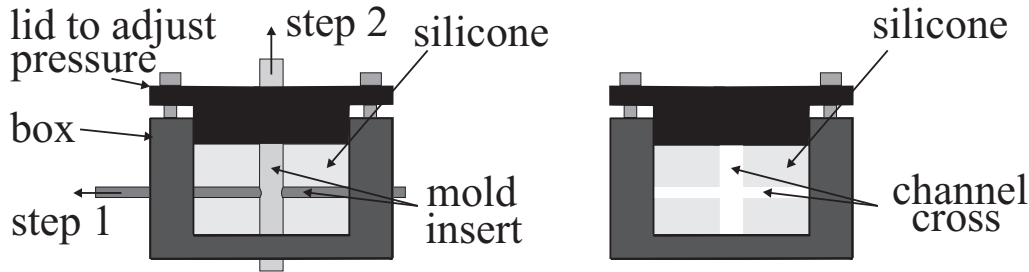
Sketch of the molding process for molded valve. A mold insert is formed by a vertical and a horizontal rod. The horizontal goes through the vertical rod, and the diameter is therefore smaller. When the silicone has cured the mold insert can be pulled out. On the sketch is also shown a lid to adjust the pressure on the seal.
